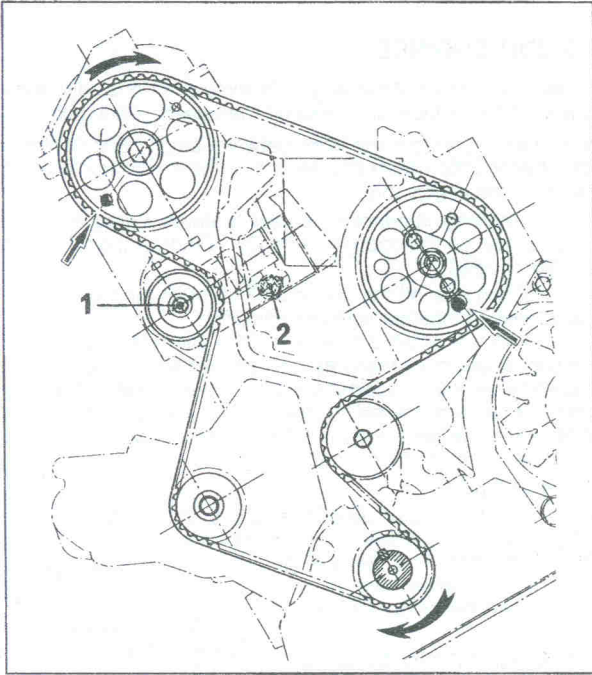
The arrows show where the 8 mm bolts must be inserted to lock camshaft and injection pump sprocket during removal of the timing belt. There is no need to lock the sprockets if the engine is being dismantled completely.
